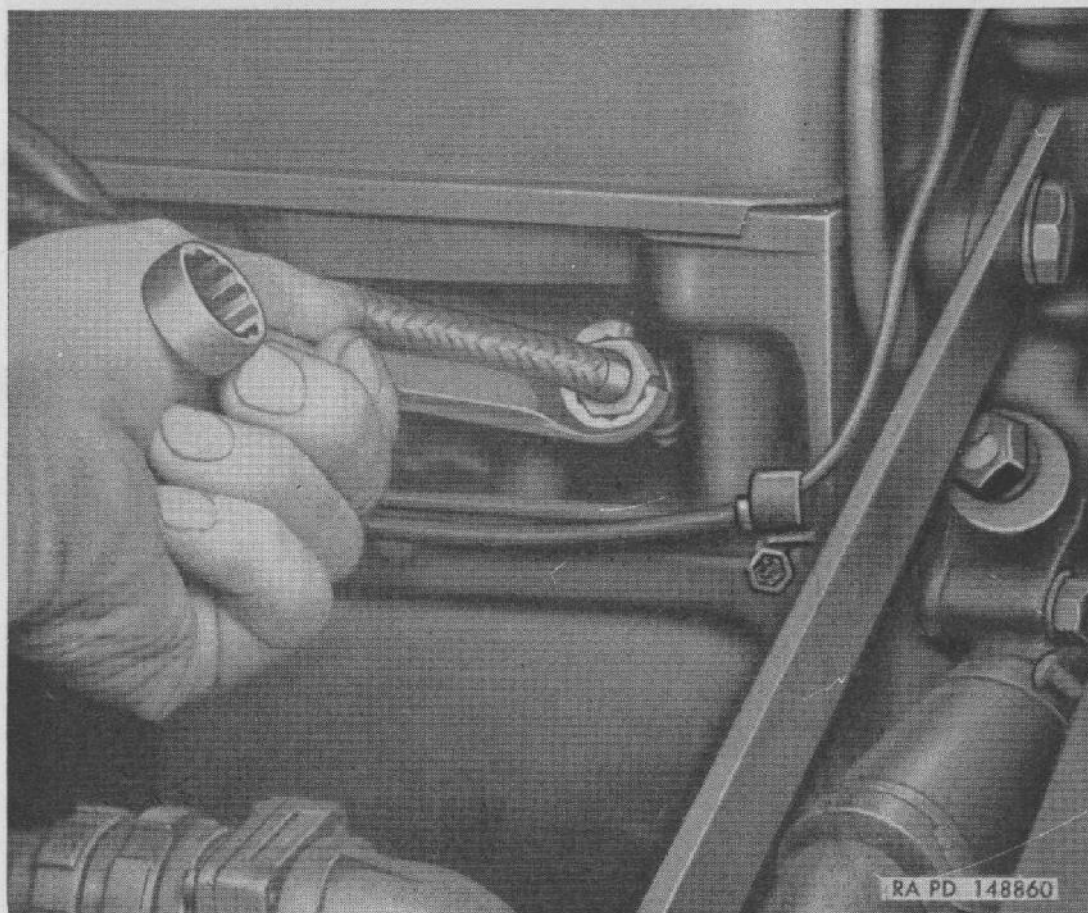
Disconnecting cable from spark plug using wrench 41-W-3297-760.
